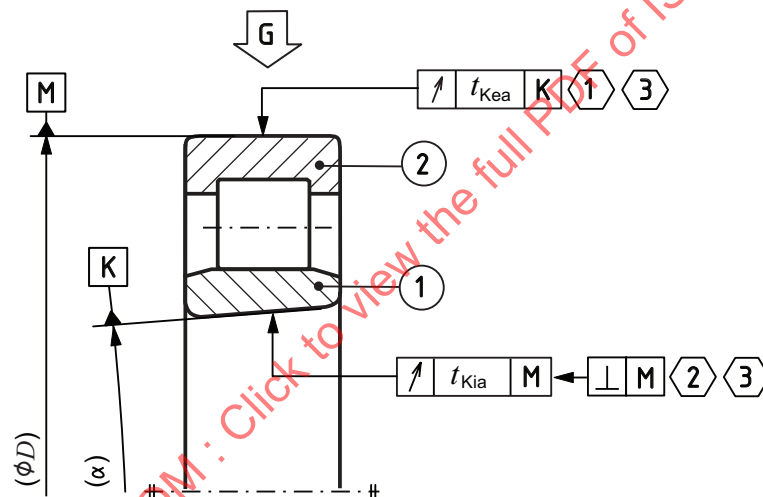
Geometrical tolerances for single components for bearing with tapered bore
